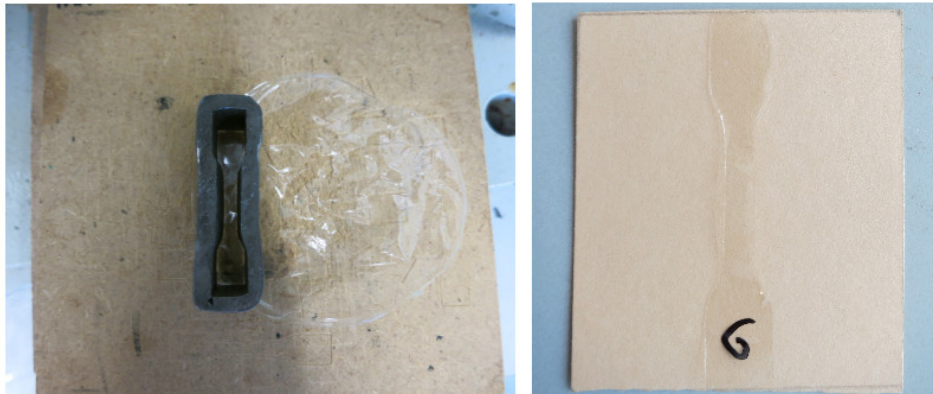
Stamping out of dumbbell specimens from chitosan foils using a cutting die and a screw press.
